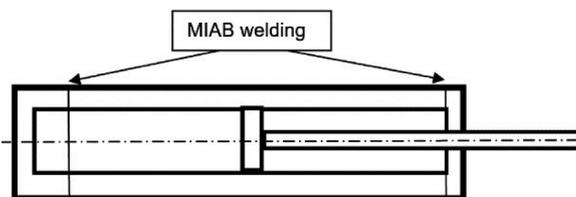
Application MIAB for welding hydraulic cylinder.
